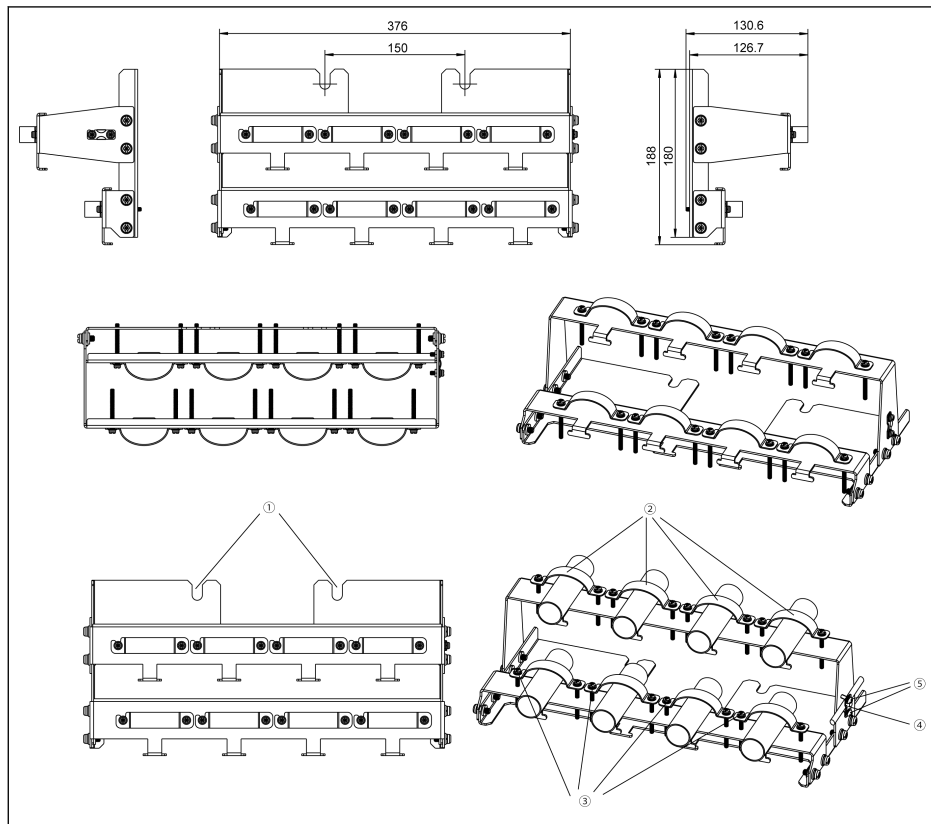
Shielded cable connection with accessories for K housing (FEAM03.2-005-NN-NNNN)
